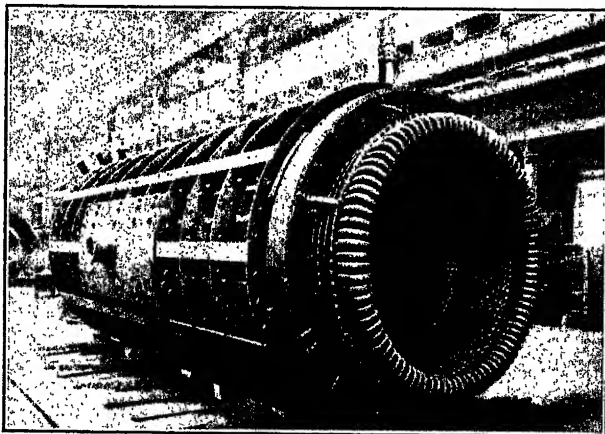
100,000-Kv-A., 1500-REV. PER MIN., 16,500-VOLT, 50-CYCLE GENERATOR
